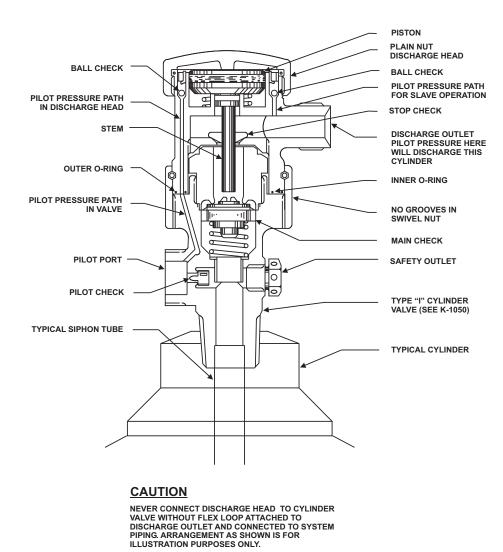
Installation of Plain Nut Discharge Head to Cylinder Valve
